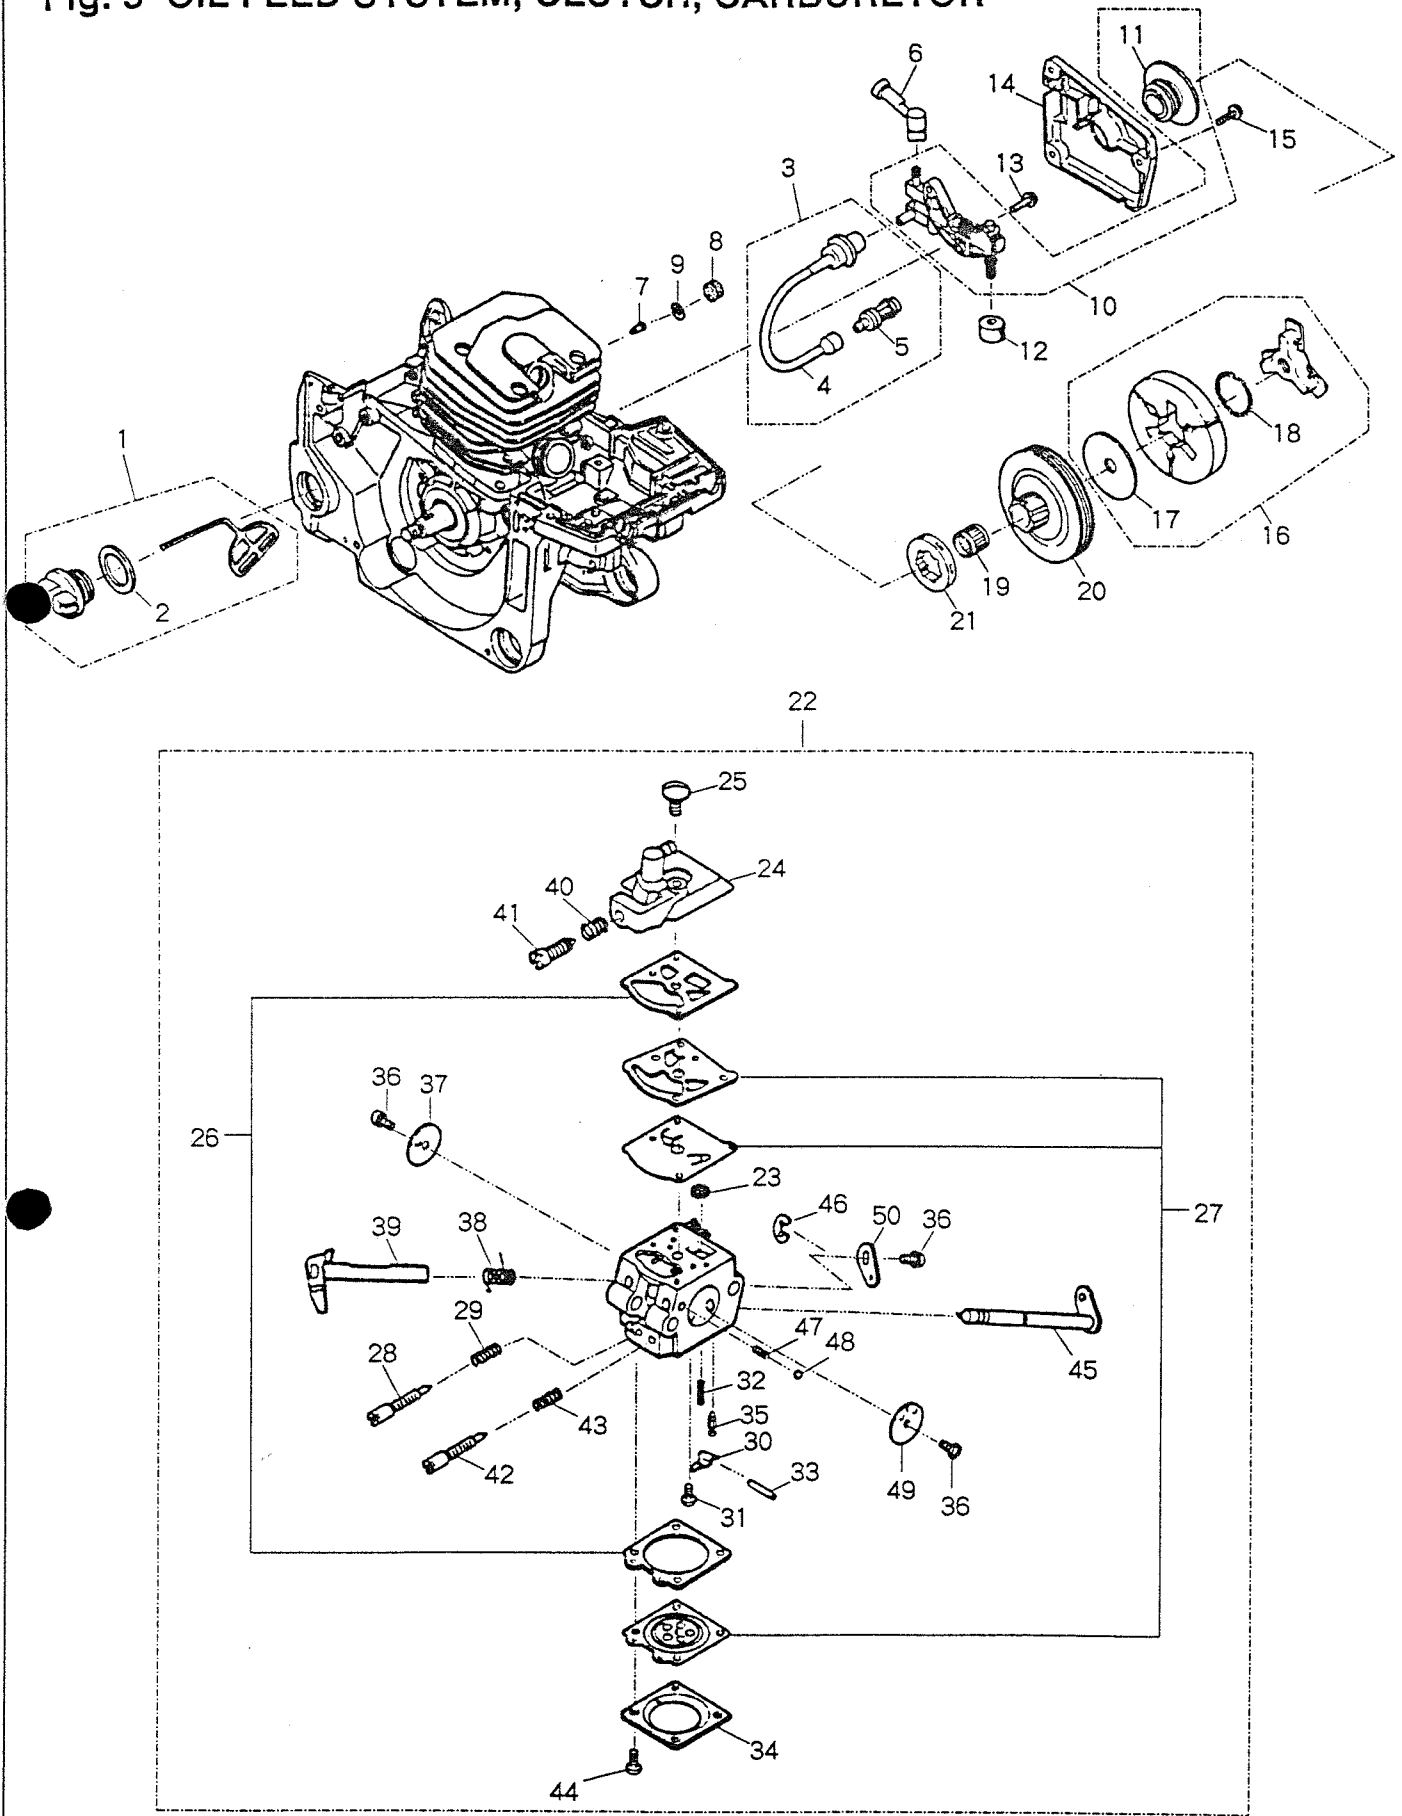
OIL FEED SYSTEM, CLUTCH, CARBURETOR
